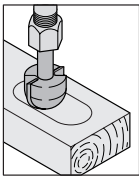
Insert the shaft of the router head (not included in the scope of delivery) into the collet (21) by approx. $\frac{3}{4}$ shaft length.
